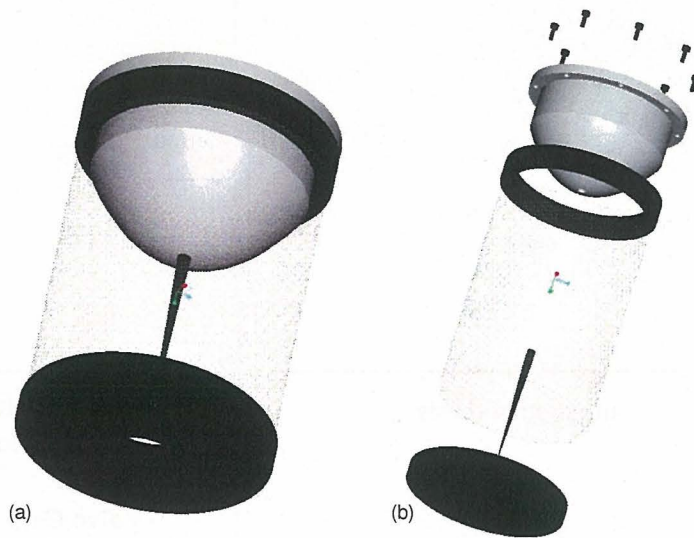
(a) An assembled panoramic mirror. (b) An exploded view of the panoramic mirror assembly.
